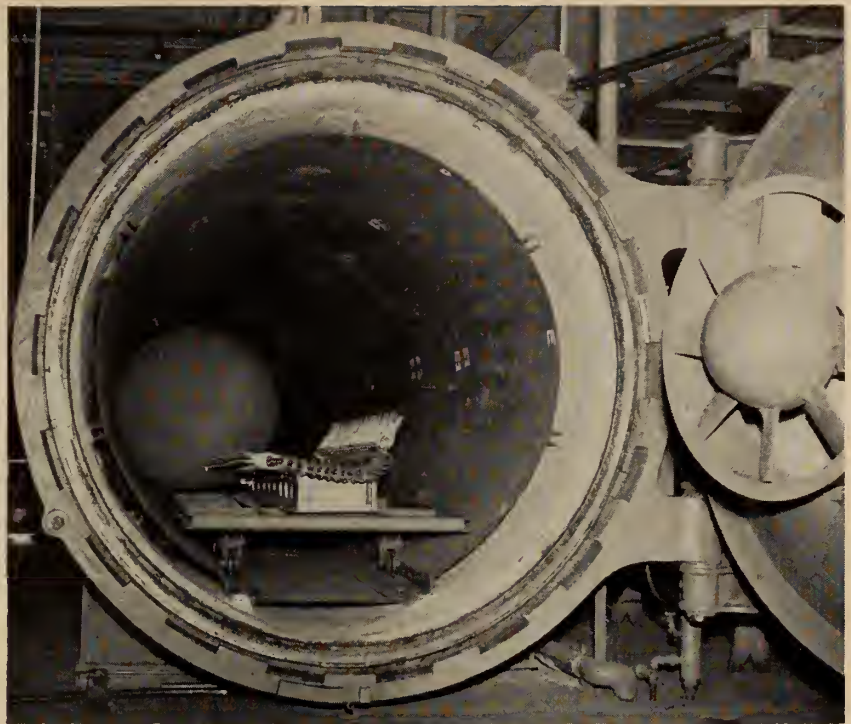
Autoclave door with air circulating fan and motor. Assembly in position ready for curing of the adhesive.
